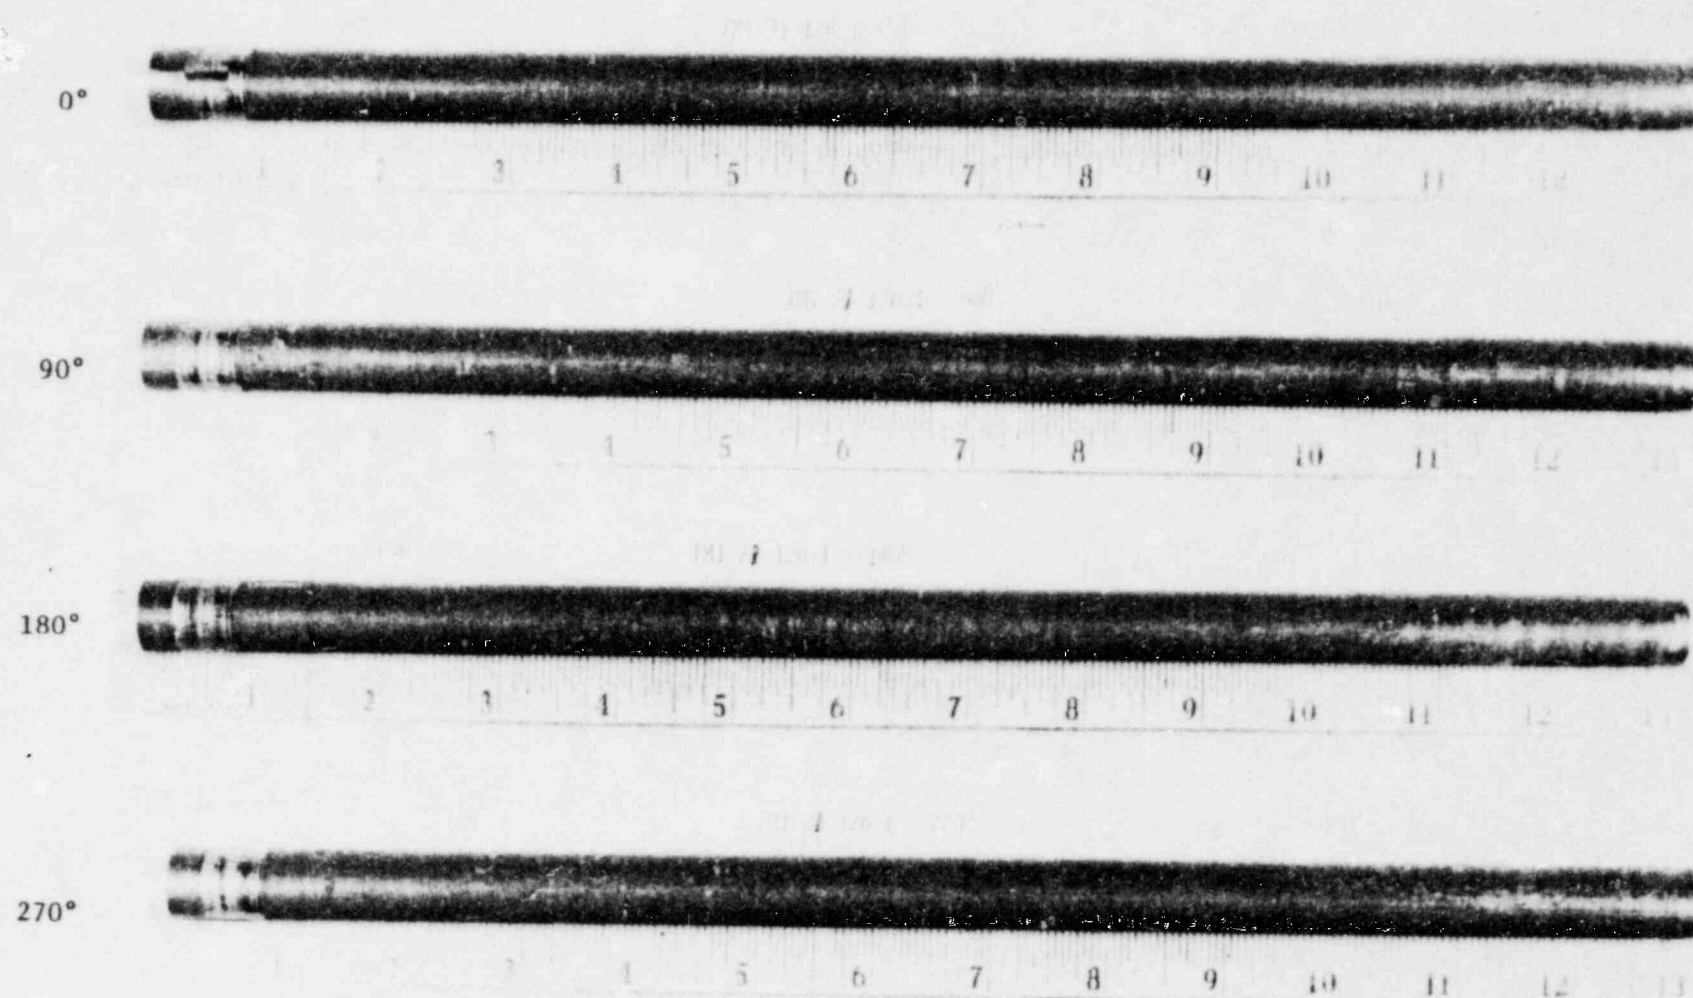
APPEARANCE OF AS-RECEIVED TUBE A-71-126 SEGMENT 1 0, 90, 180 AND 270 DEGREE POSITIONS
